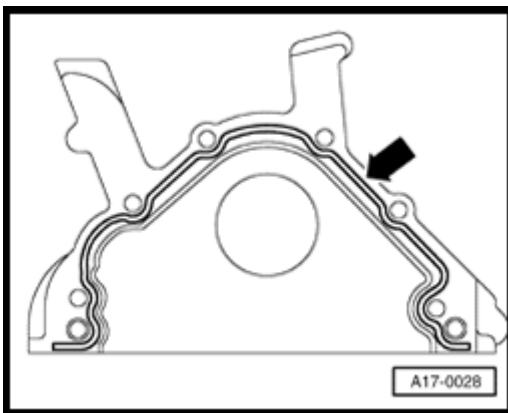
Applying Silicone Sealant Bead To Clean Sealing Surface Of Sealing Flange
